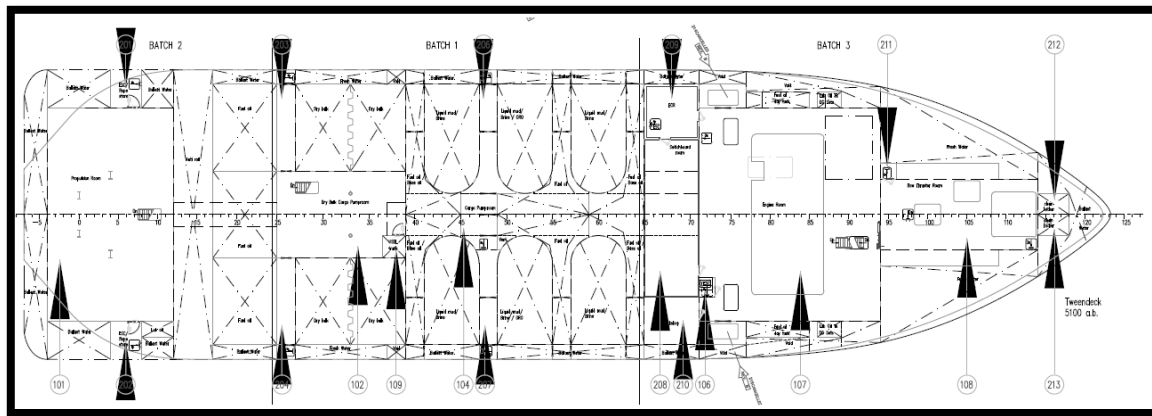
Space Identification Plan, tween deck horizontal section. DAMEN copyright
